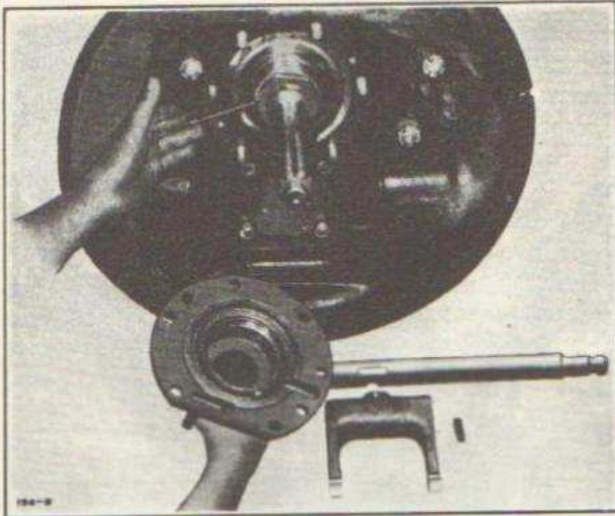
Installing Main Driving Pinion Oil Vane and Cover
